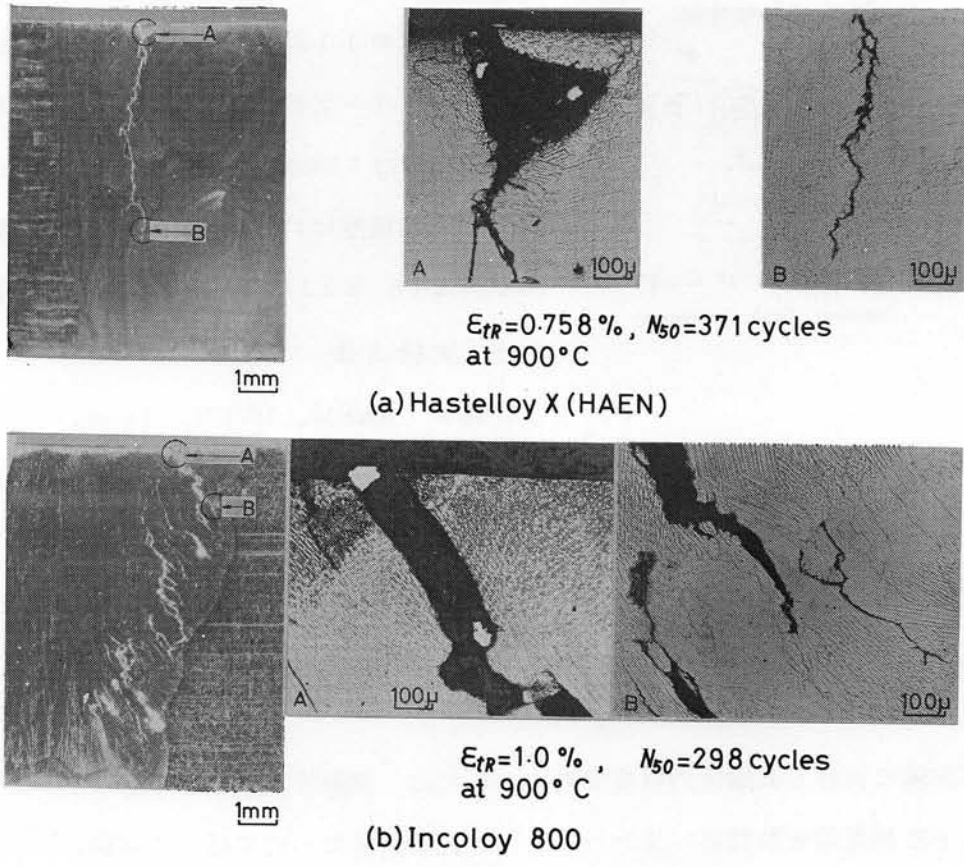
Microstructure of Fatigue Test Specimen of TIG Weld Joint
